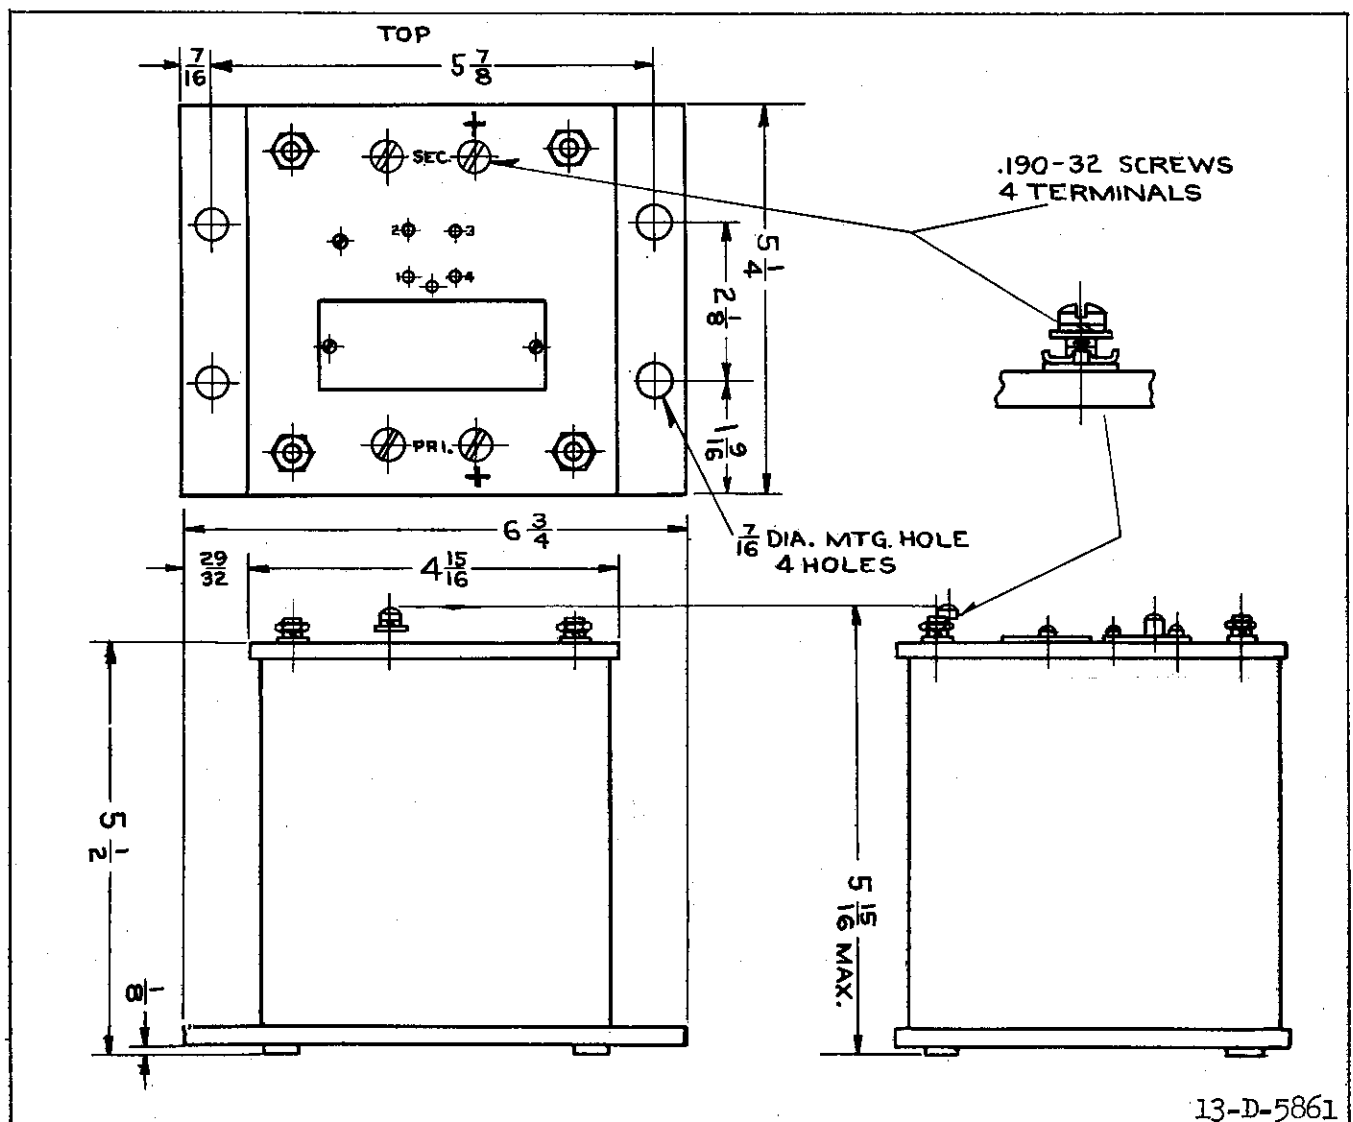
Outline and Drilling Plan of the HKB Test Transformer.
